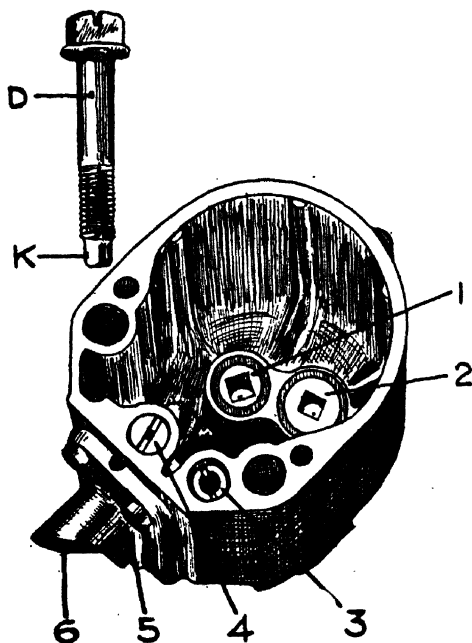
Jet chamber of Zenith V-type carburettor. D is one of the two fixing bolts, having locating guide at K.
